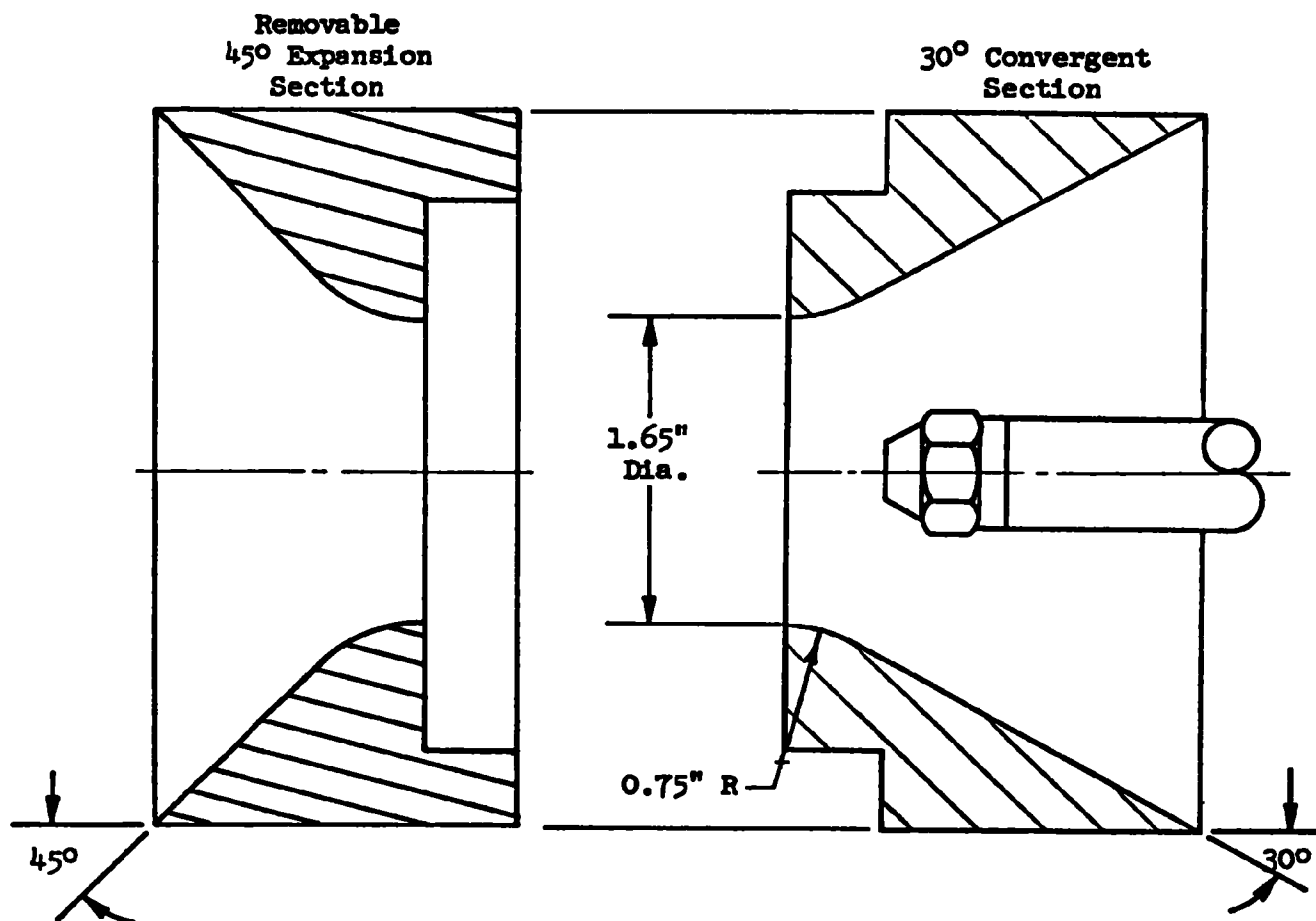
Cross-section view of the fixed geometry, 1.65-inch-diameter no-swirl optimum burner head
